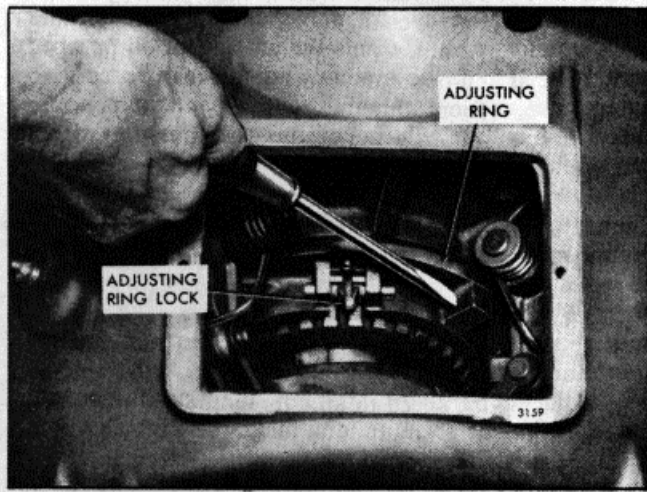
Power Takeoff Assembly Showing 14" Diameter Clutch Adjusting Ring shaft to prevent the
